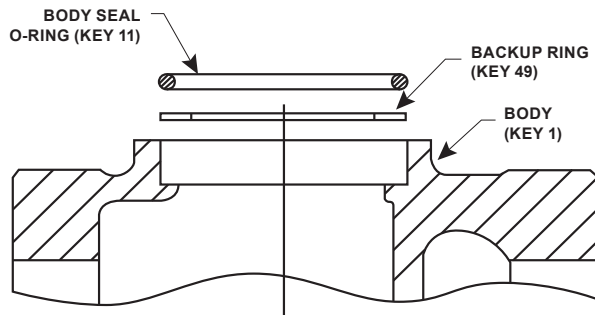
Expanded View of the Body Area Showing the Body Seal O-ring and Backup Ring Placement
